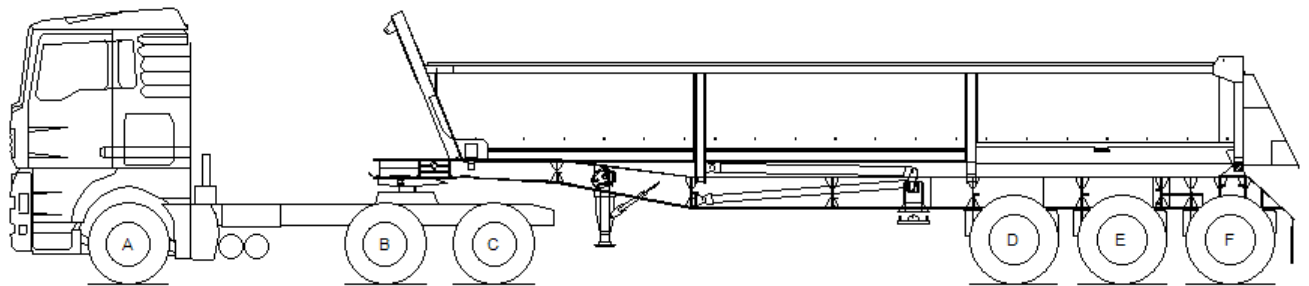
2-dimensional side view of the tipper semi-trailer
